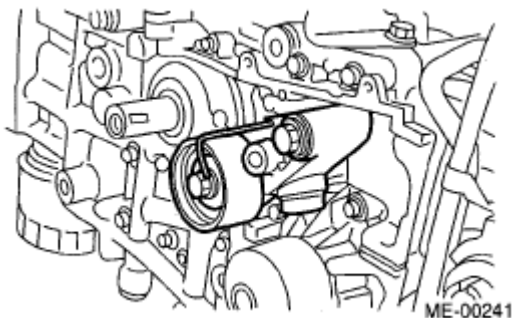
Identifying Automatic Belt Tension Adjuster Assembly
